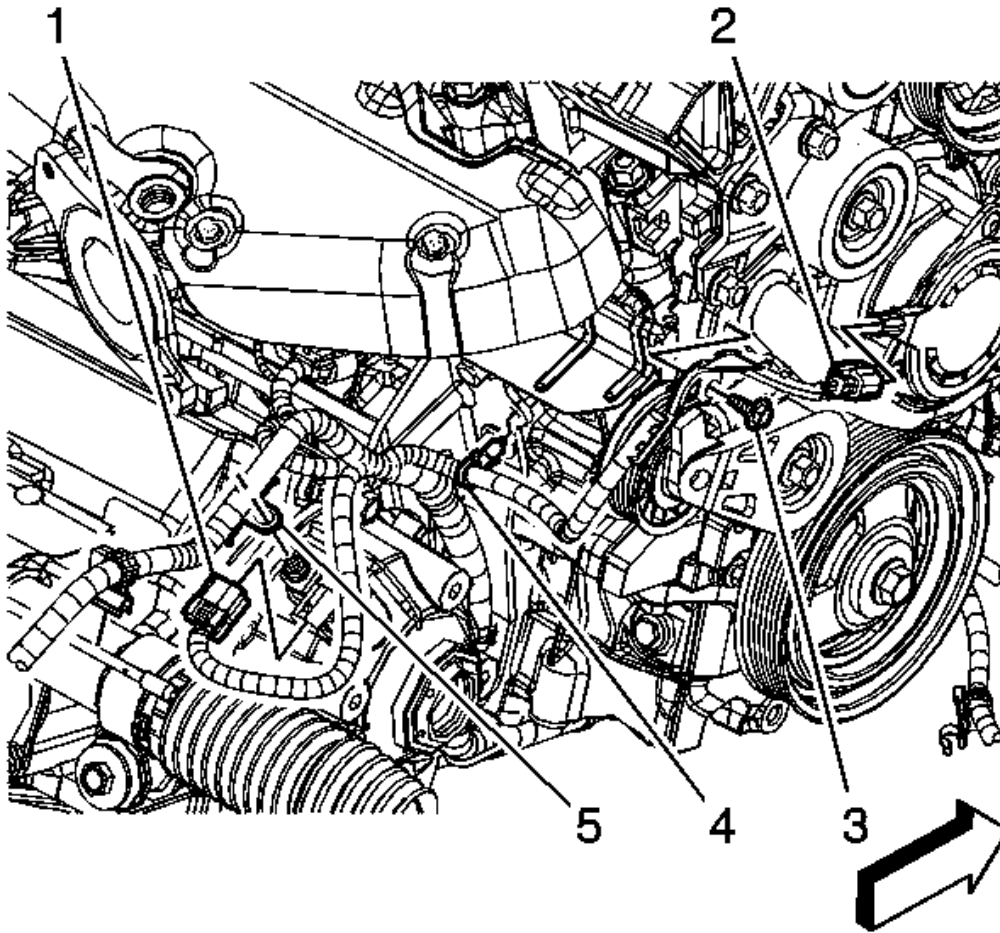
Locating Camshaft Position Actuator Magnet Electrical Connector
